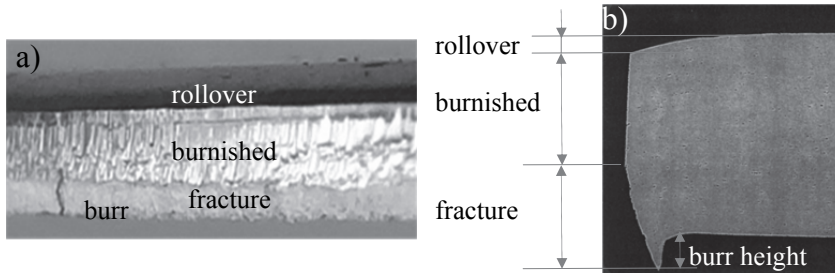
Typical sheared edge profile with marked zones: a) front view, b) cross-sectional view
